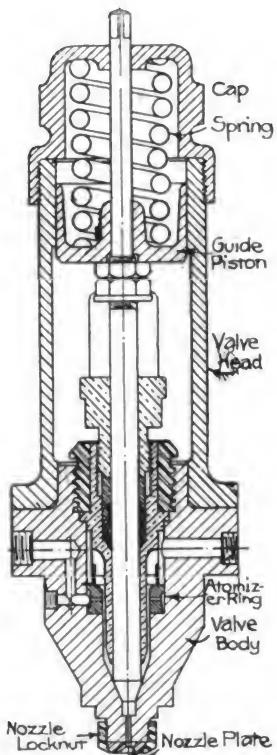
Detail drawing of spray valve, showing construction and method of working
